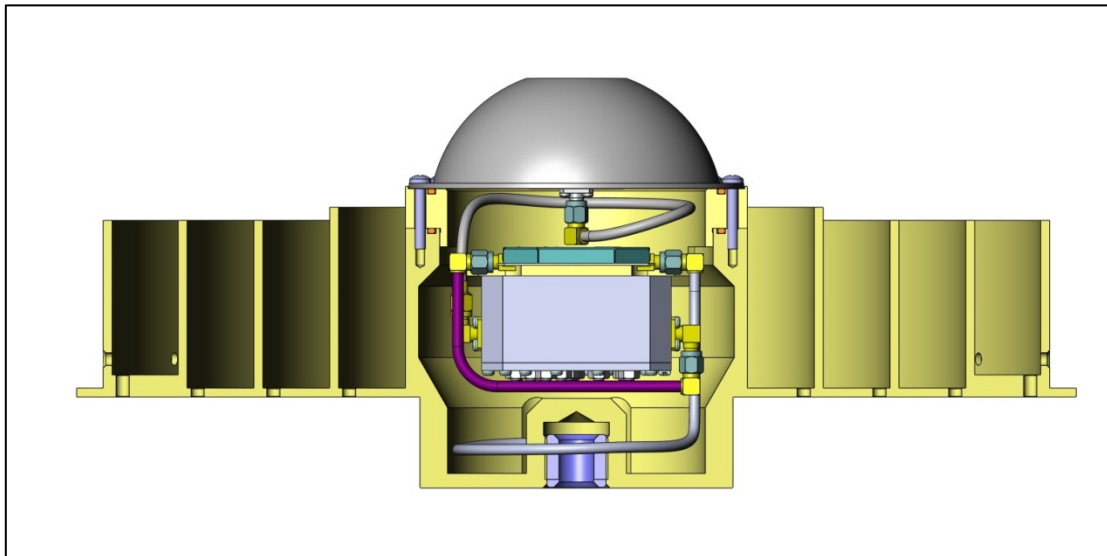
Mechanical assembly of CR-G5-C antenna
